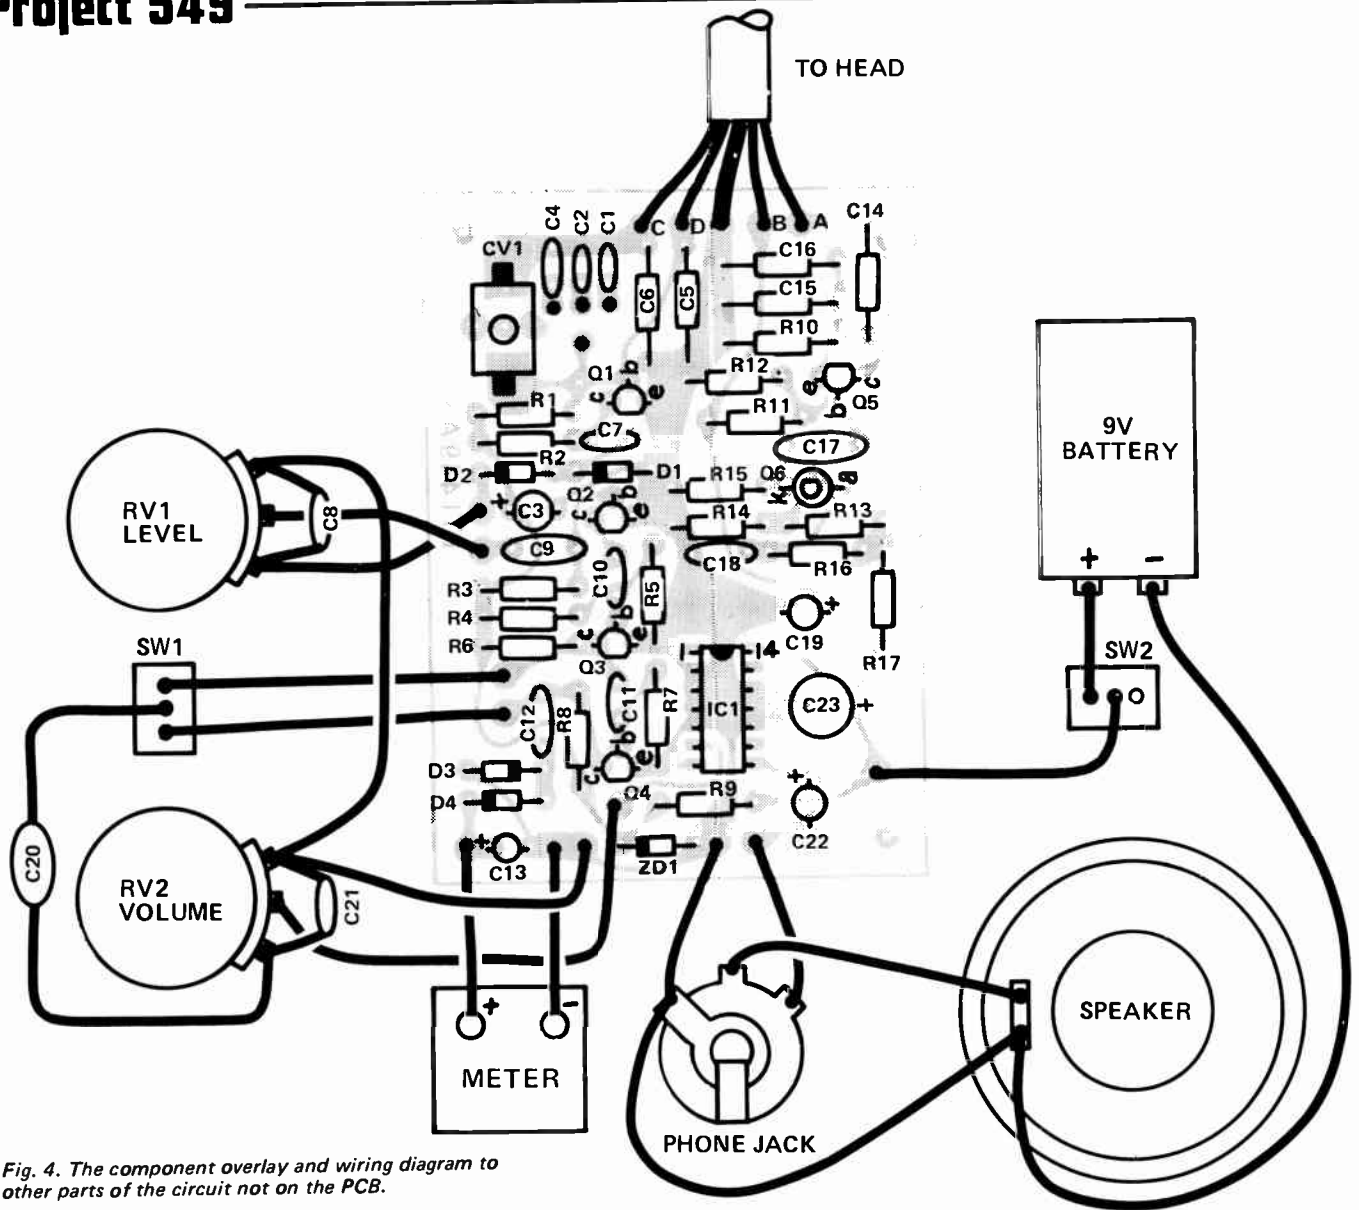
The component overlay and wiring diagram to other parts of the circuit not on the PCB.
